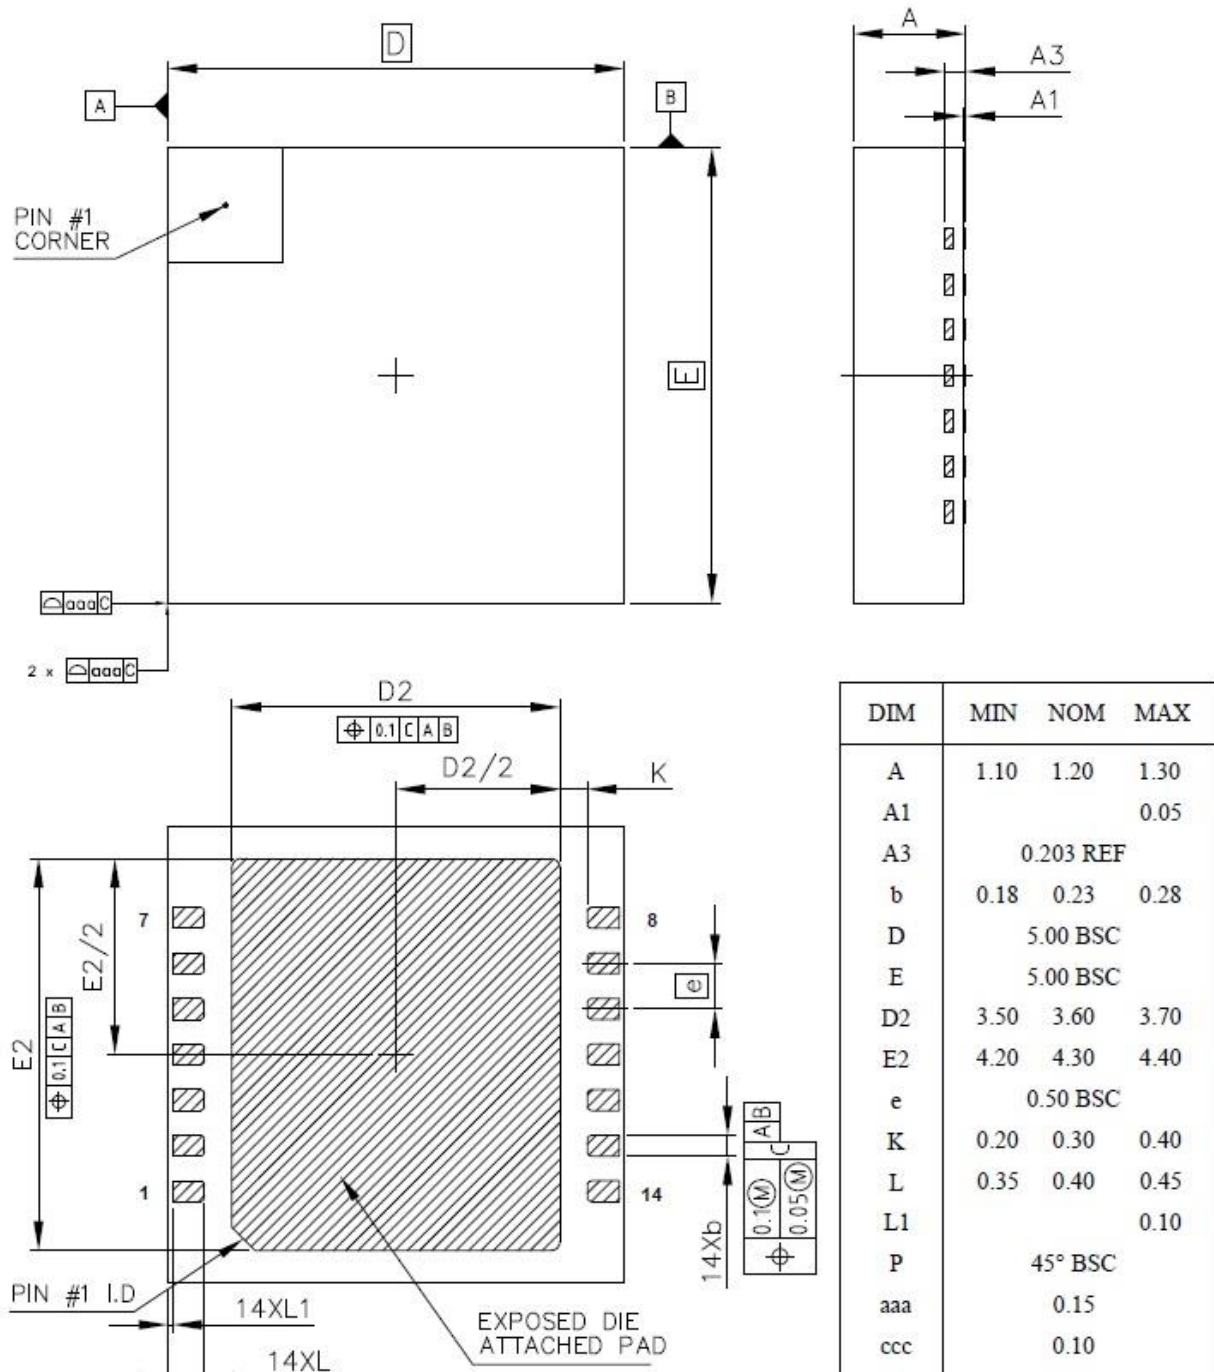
5 x 5 x 1.2 mm Package Outline Drawing
